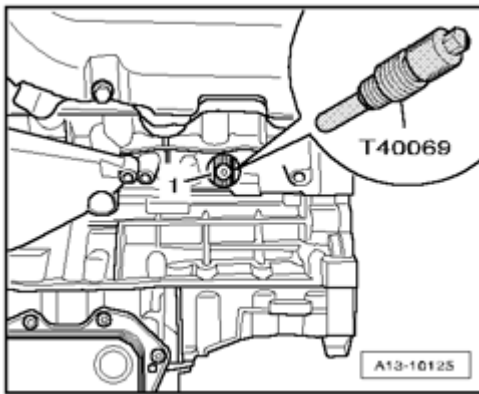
Installing Crankshaft Holder T40069 Into Hole
